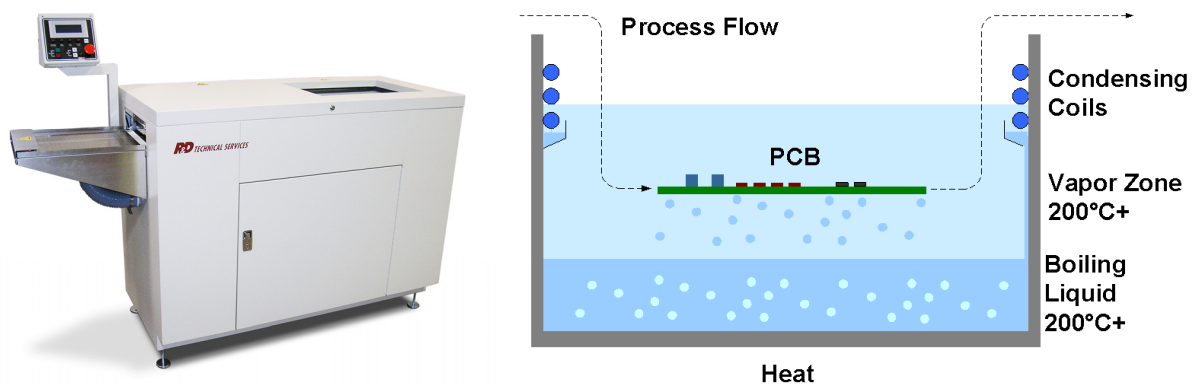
VPS machine and process (photo courtesy of R&D Technical Services).
